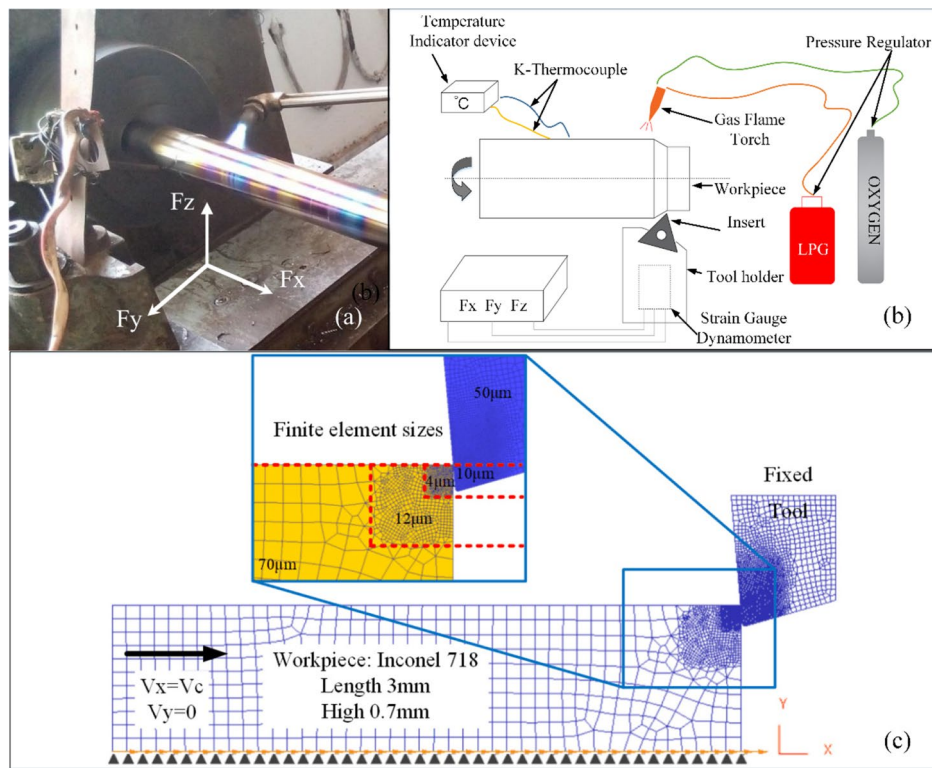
Hot machining. a Experimental setup [24]. b Schematic diagram. c The boundary and meshing conditions of FE models
